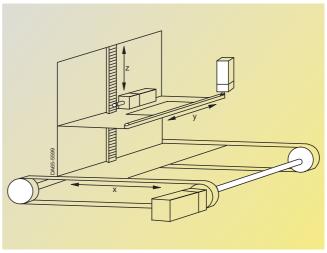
/7 Line drawing of a three-axis conveyor vehicle
